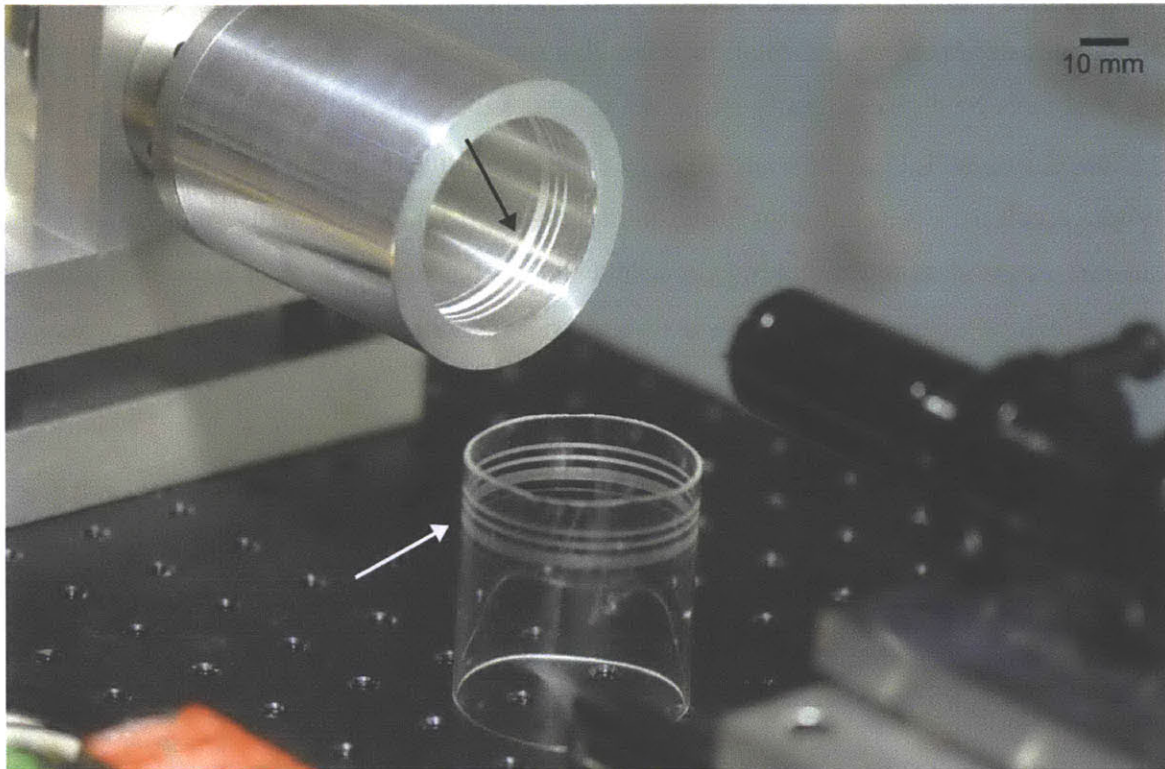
The centrifugal casting machine designed by Petrzelka, and a cylindrically cast stamp [19]. This machine works by using a laser to pattern a thin layer of photoresist on the inside of a rotating drum. PDMS resin is then poured into the spinning drum, and the centrifugal force causes the resin to evenly spread throughout the interior surface of the drum. Once the resin is cured, the cylinder is stopped and the stamp is removed. Note the seamless nature of this stamp, and the ability it affords for continuous printing.
